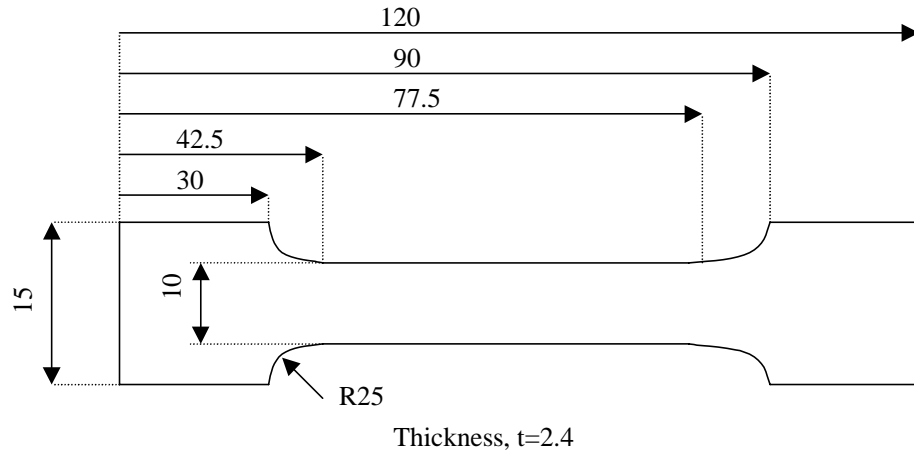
Geometry of tensile specimen used for testing of the heat treated material, extruded material and cold rolled material.
